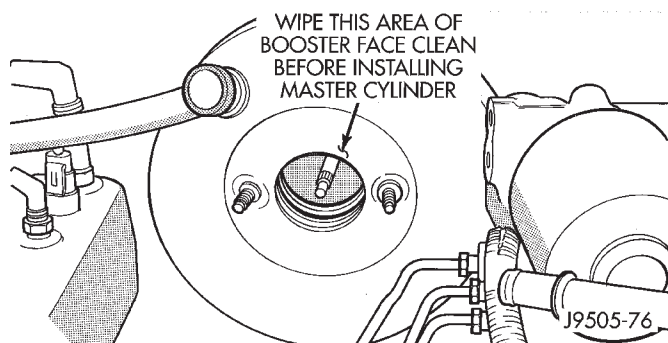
Cylinder Mounting Surface Of Brake Booster
